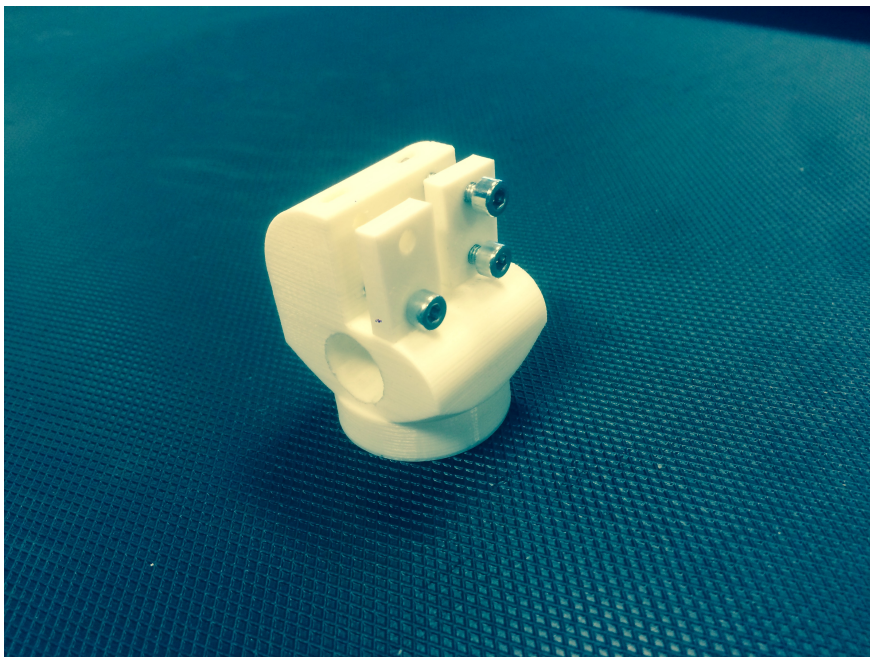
The mount that holds the modified paddle, ready for bearings to be mounted on it.
